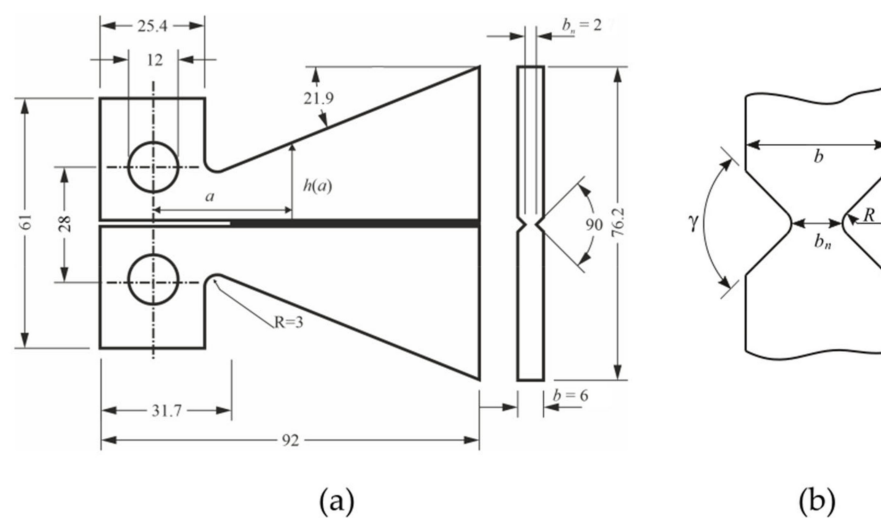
The geometry of the TDCB specimen with dimensions in millimeters (a) and a detailed view of the grooved section of the specimen (b).
